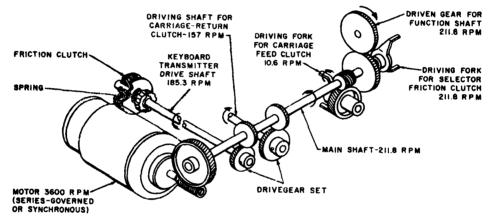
Mechanical power distribution with 60 wpm drive gear set.
